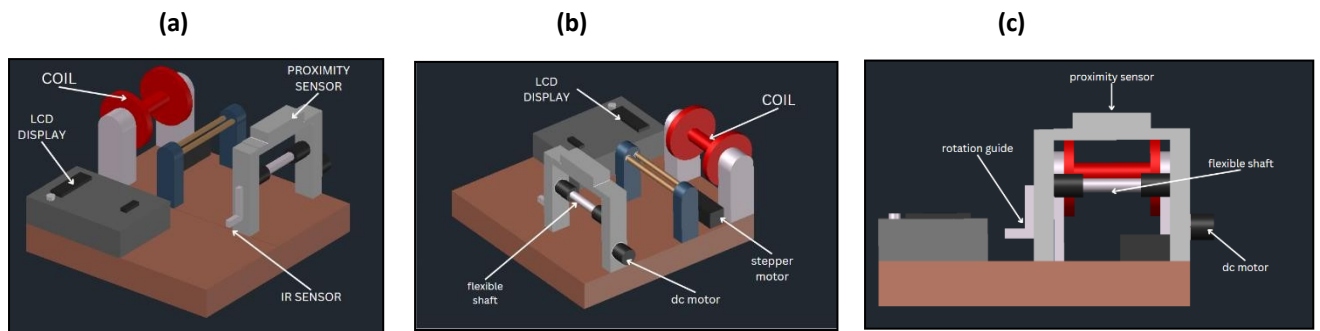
The prototype of coil winding machine (a) right side, (b) left side and (c) front side of design
